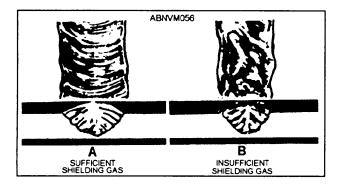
Weld bead characteristics determined by shielding gas.
